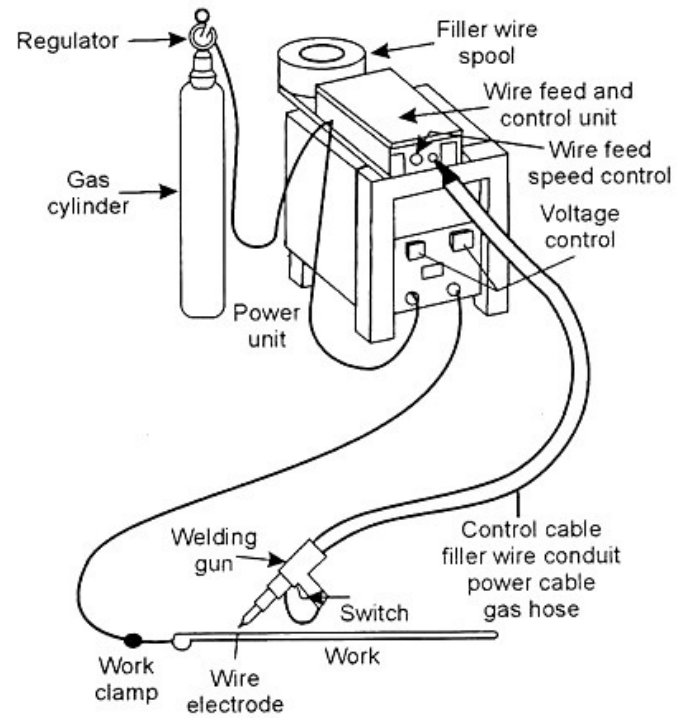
Components of Gas Shielded Metal Arc Welding Process
